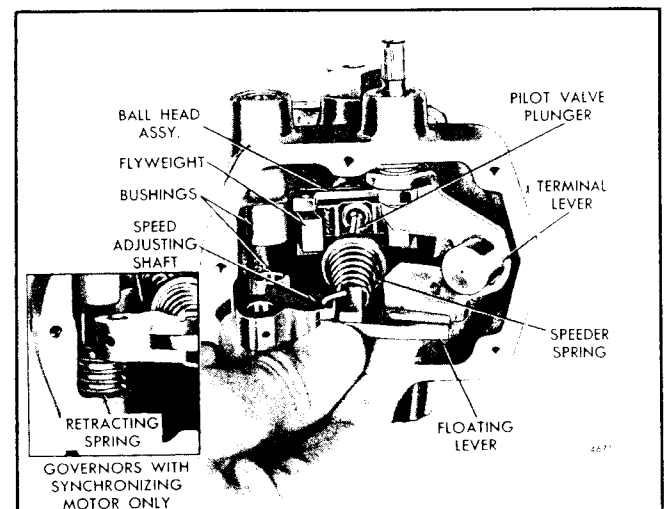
Installing Speed Adjusting Lever, Floating Lever, Speeder Spring and Pilot Valve Plunger Assembly
